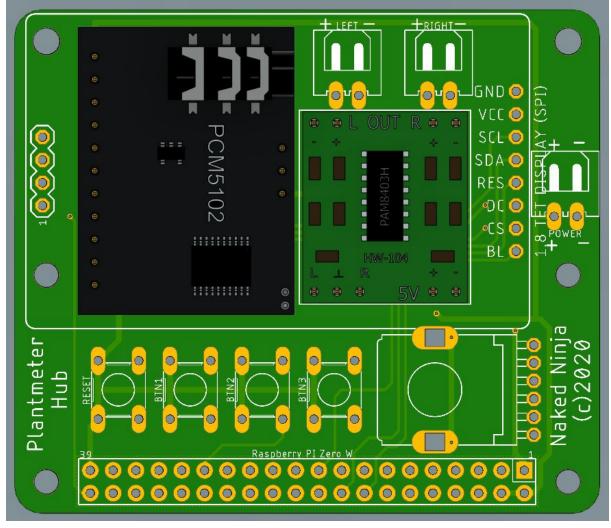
Toby PCB with PCM5102 and PAM8403 soldered, Top view
